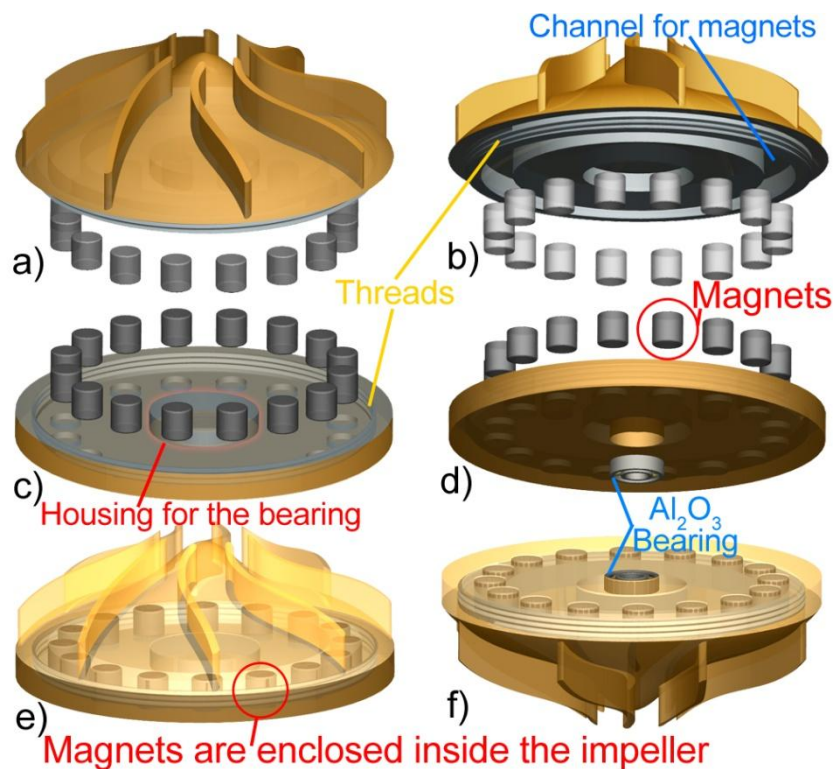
The New Design of the Impeller; a) top side of upper element, b) bottom side of upper element, c) top side of lower element, d) bottom side lower element, e) top view of the impeller mounted, f) bottom view of the impeller mounted
